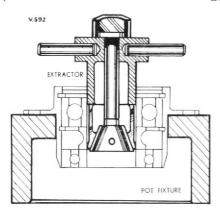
Pot fixture T.74757 and extractor T.74759 for removing the upper bearing from lower driving gear bearing housing.
